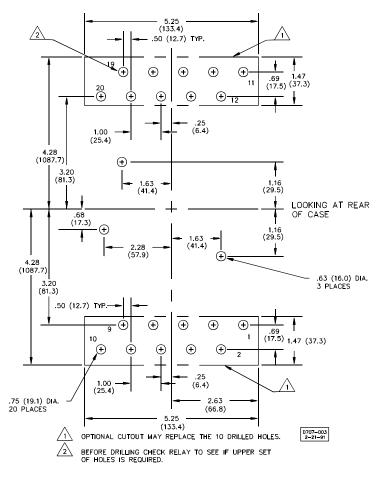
Panel Drilling Diagram (Projection Mounting)
